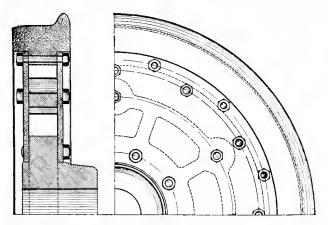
Paige Plate Coach Wheel. Cast Iron Spider with Steel Plates Secured by Bolts.
